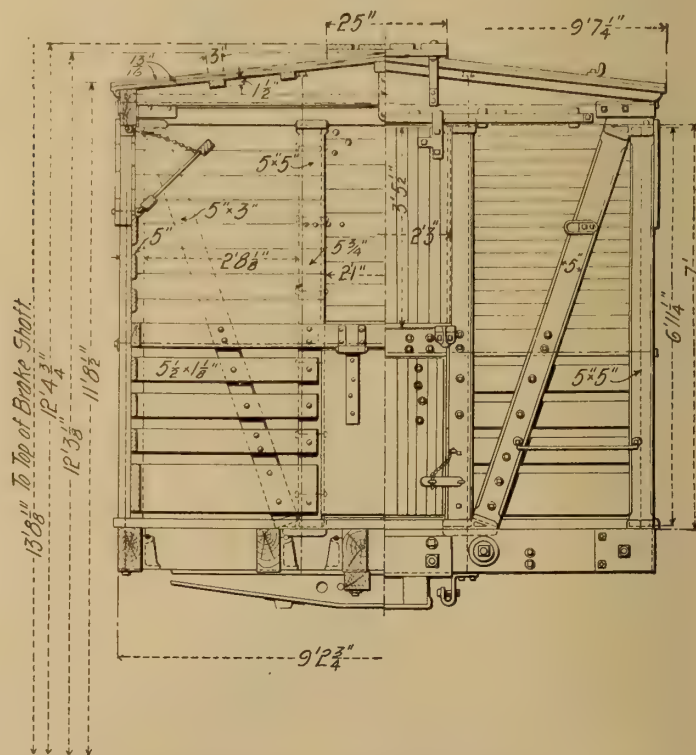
HALF SECTION AND END ELEVATION OF 36-FT. STOCK-CAR, I. C. R. R. CAPACITY, 60,000 LBS.
